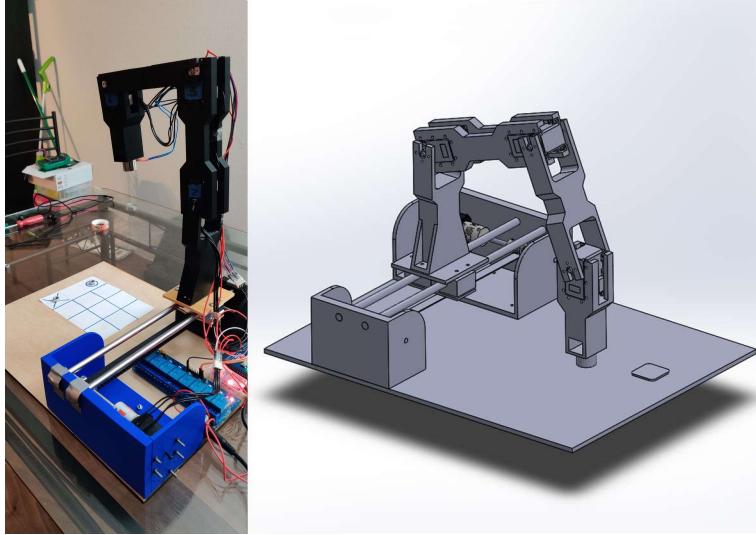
Fully assembled robot arm with game board (left). Solidworks assembly of robot arm (right).
